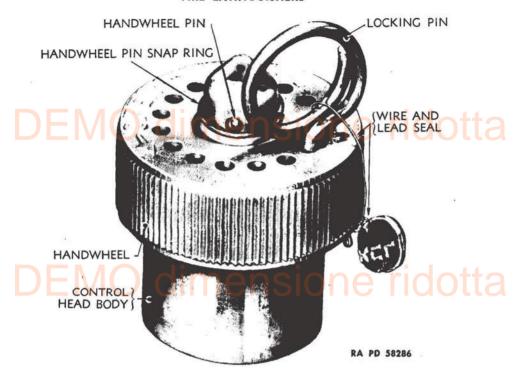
Kidde-Lux Handwheel Control Head (7½-Pound Extinguisher)
